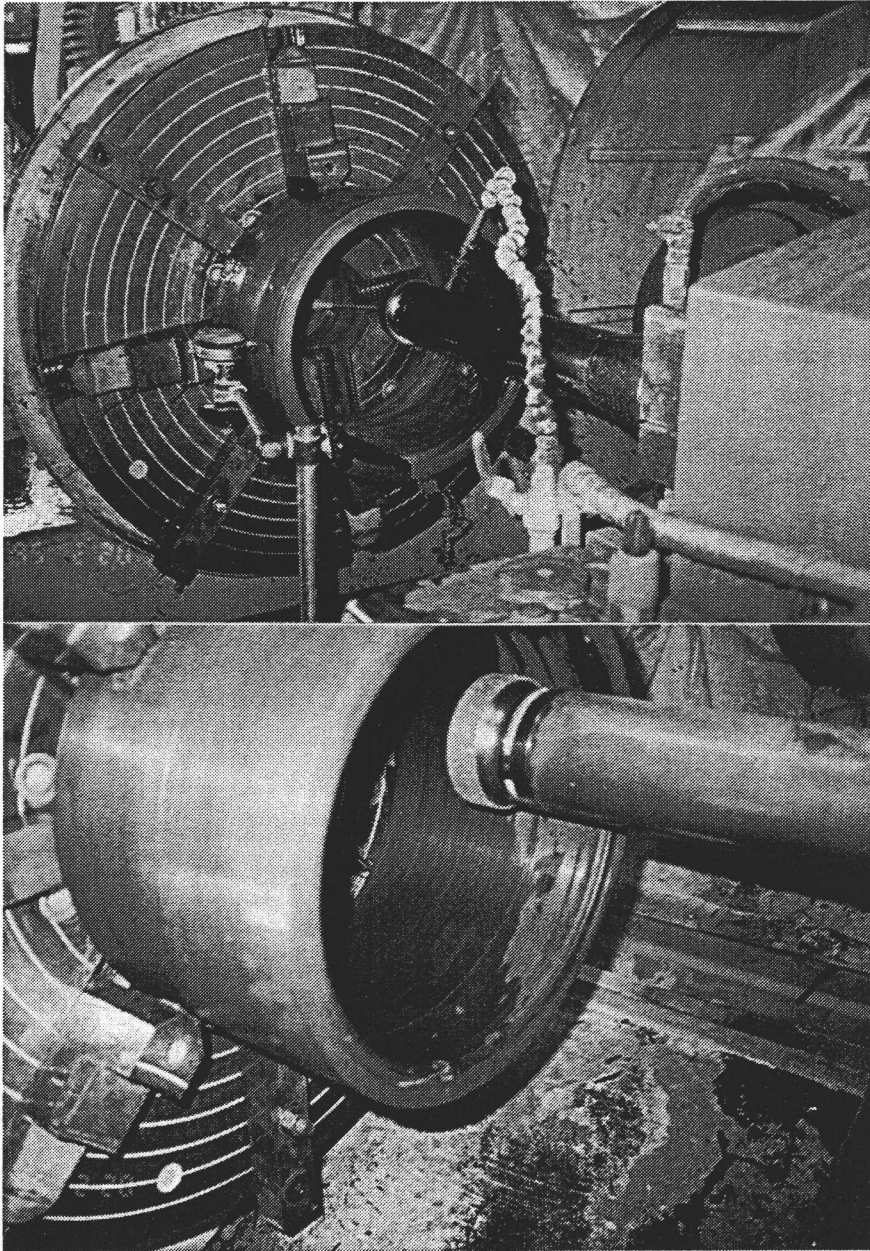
Ferrite is machined/shaped with a grinder whose surface is coated with diamond powder. To prevent heating up, it is cooled with water (top).
